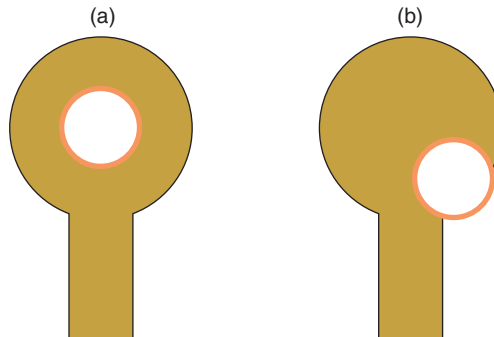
Breakout of plated through-hole due to misalignment. (a) Ideal PTH. (b) PTH breakout.
